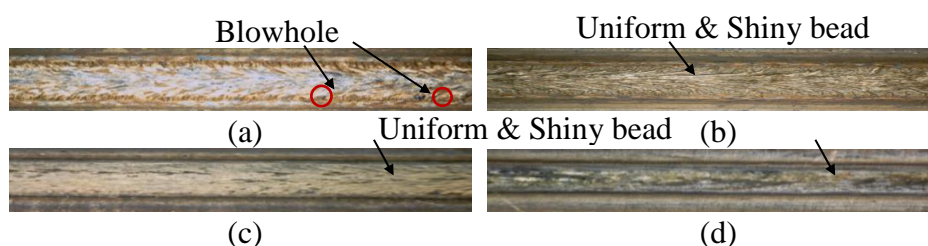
Bead appearance on top surface of welded samples with decreasing line energy for Exp. (a) 4 (80 J/mm), (b) 8 (67.52 J/mm), (c) 5 (60.01 J/mm) and (d) 6 (47.99 J/mm)
